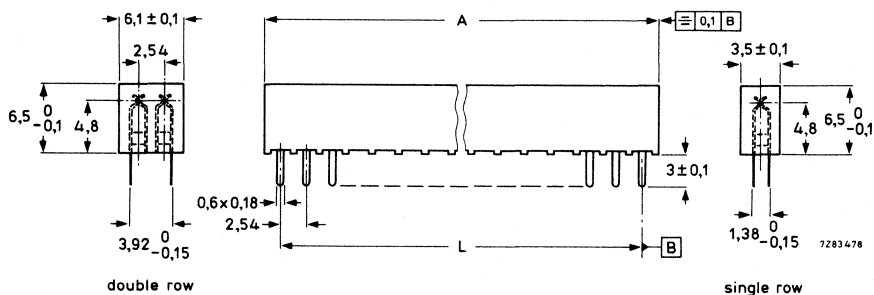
Bottom-entry socket. See Table 1 for dimensions A and L.
